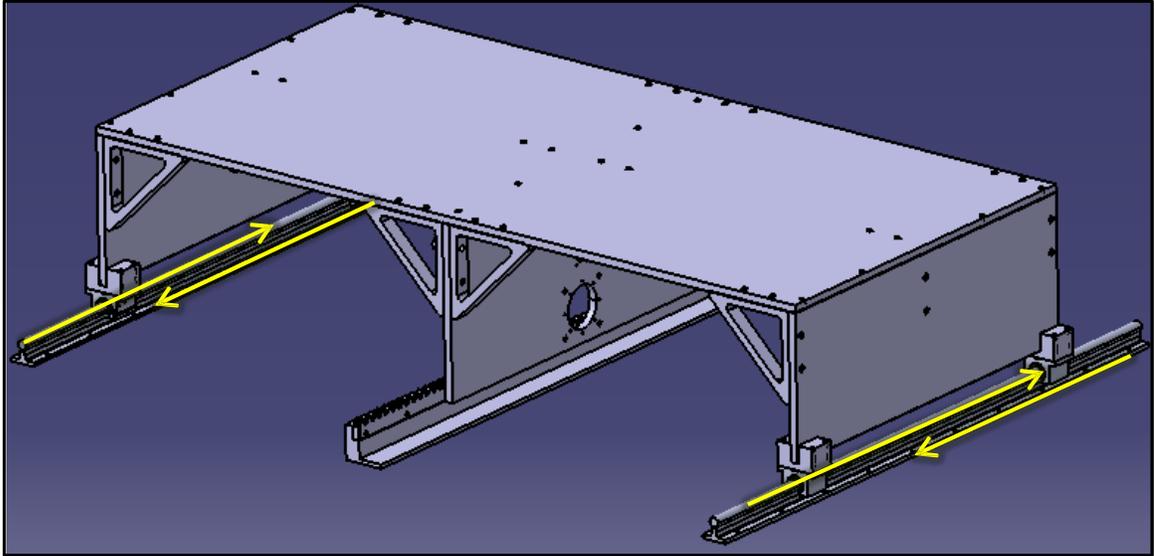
Showing Assemblies, Sub-Assemblies of the Compliant Winder Machine, CWM
